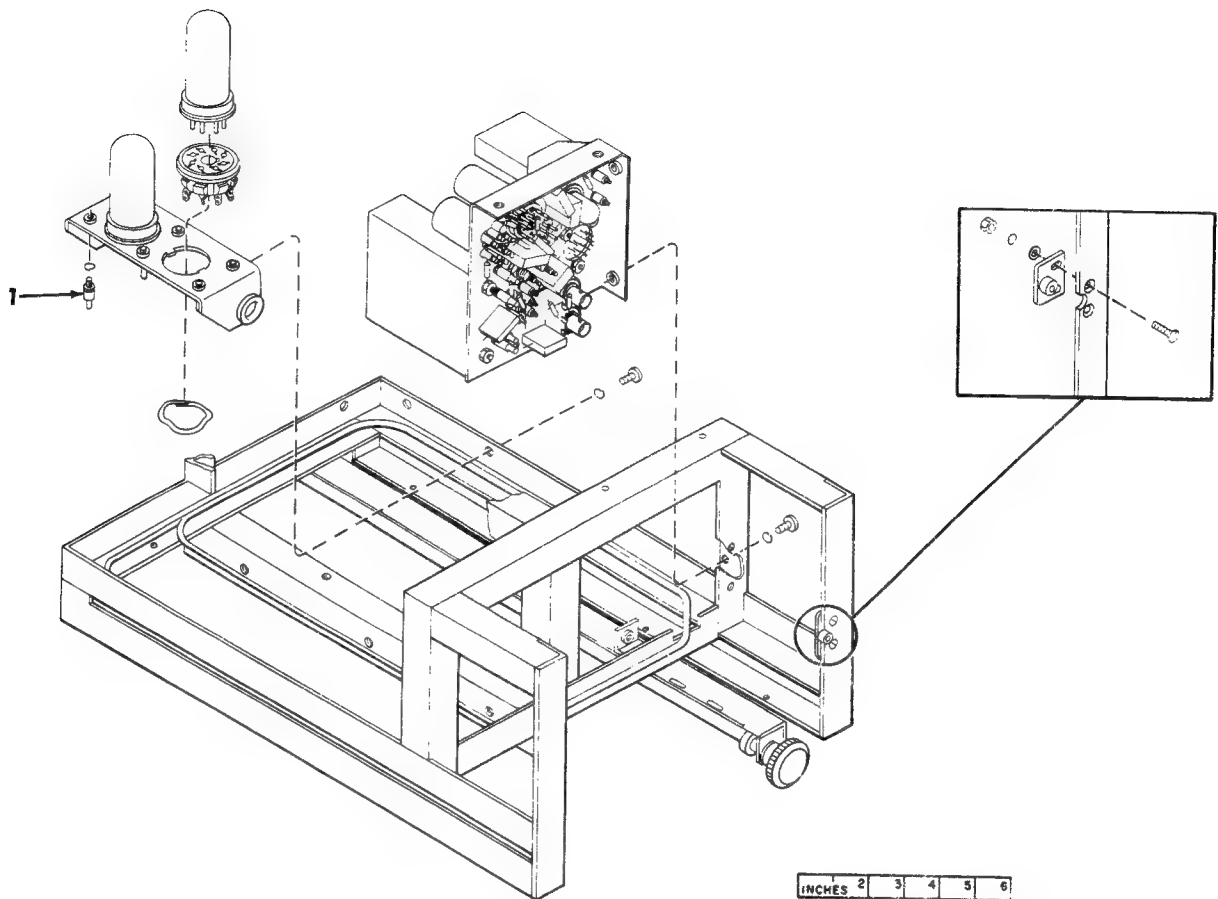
Coder set, radar KY-229/MPA (8512239)—partial exploded view
